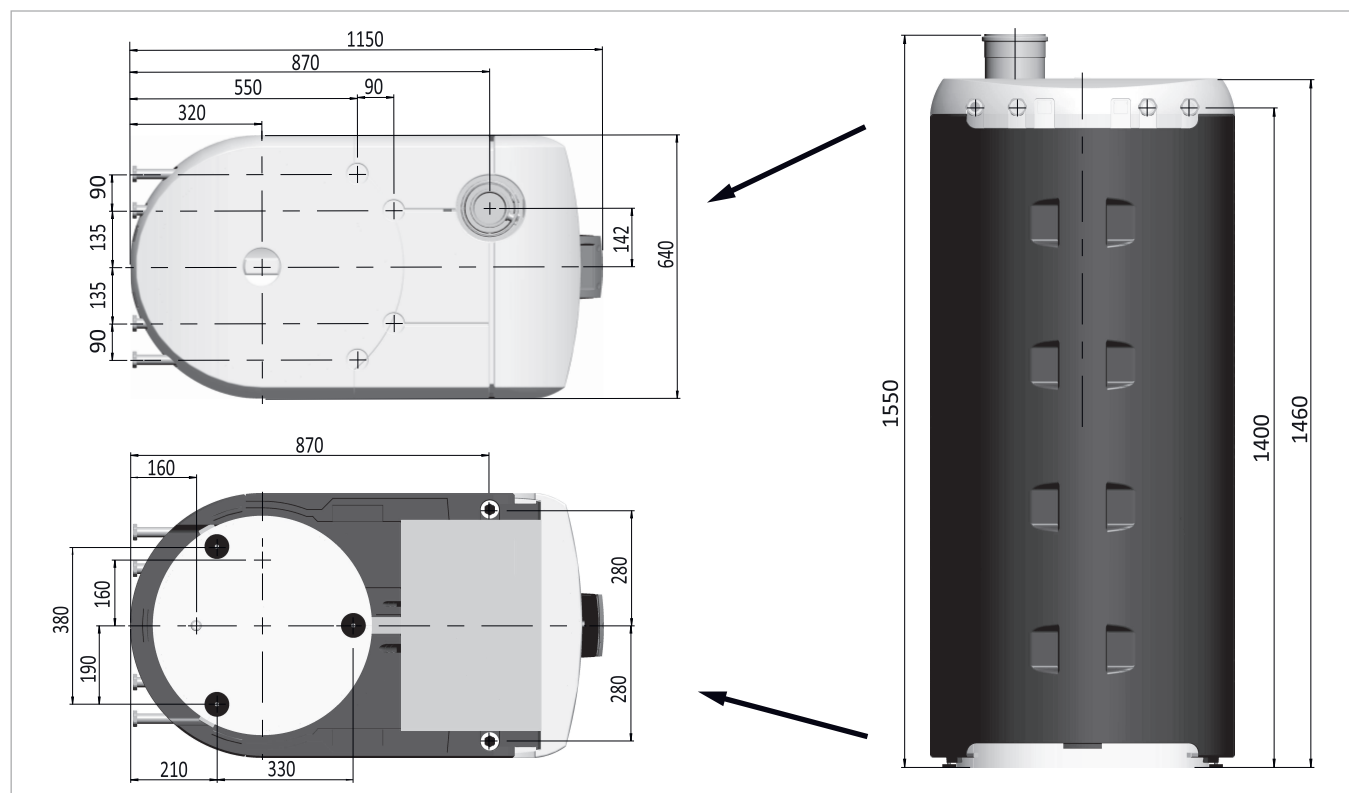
Views of the SolvisBen (all dimensions in mm)
